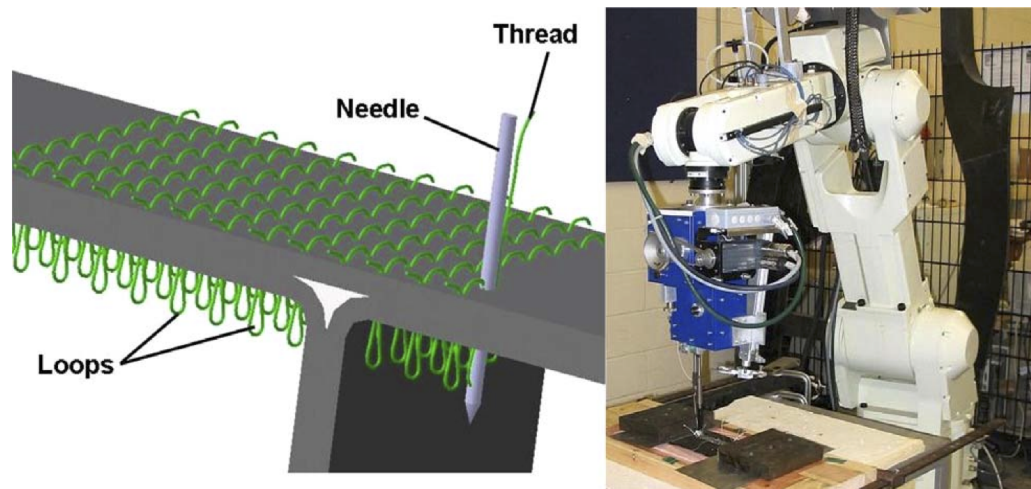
Tufted Z-direction reinforcement inserted into a T-section (left), robotic arm-mounted KSL KL150 tufting head (right) [69].
